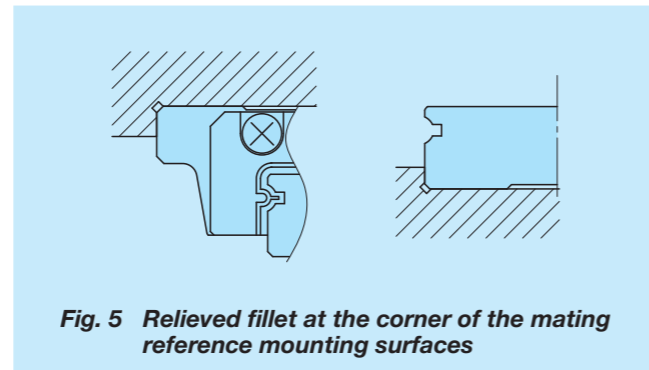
Relieved fillet at the corner of the mating reference mounting surfaces
